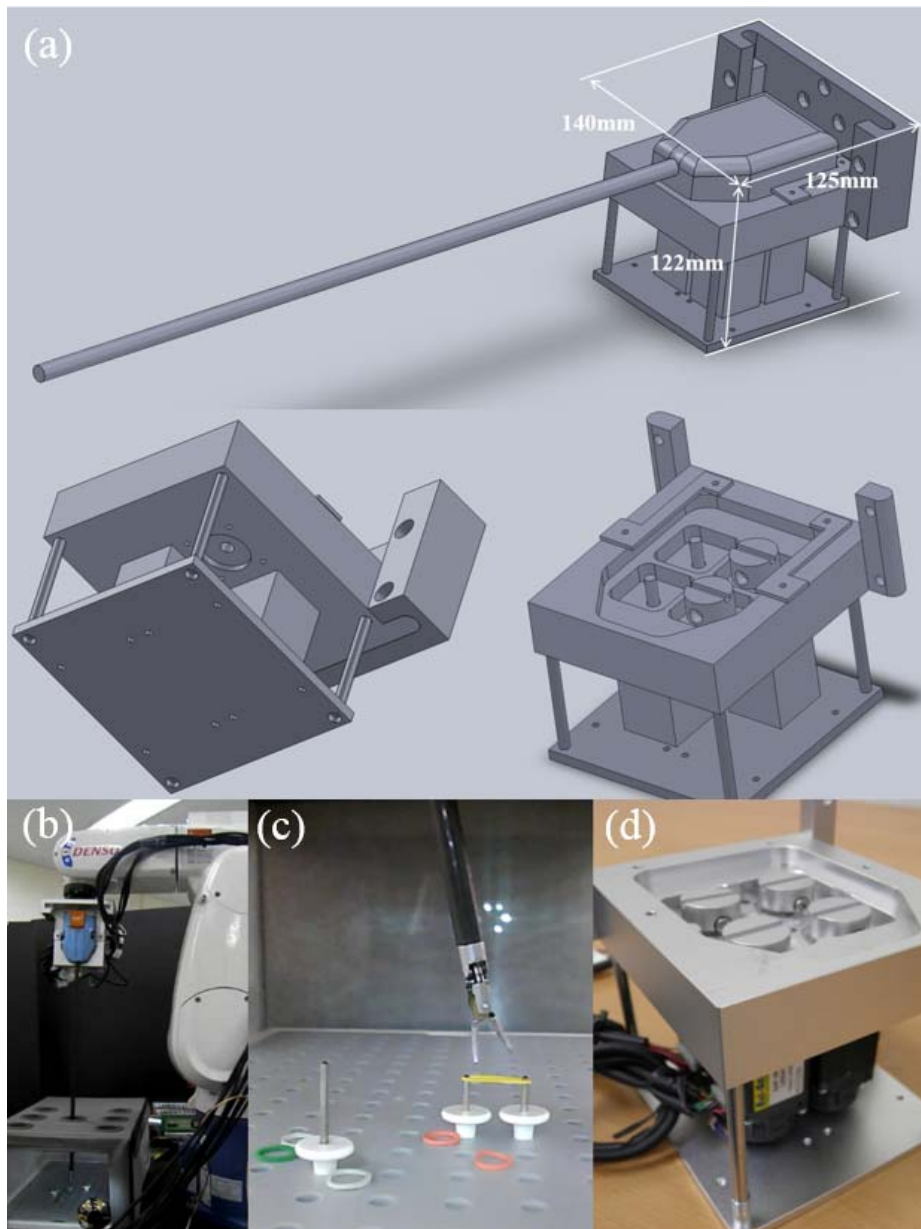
Prototype version 2, KS-2. (a) 3-D design of KS-2. (b) External arm, in-house torque transfer mount (compact size), and EndoWrist were assembled. (c) Simple peg task using KS-2. (d) In-house torque transfer mount (compact size) for EndoWrist. The EndoWrist was driven by 4 servo motors, directly.
